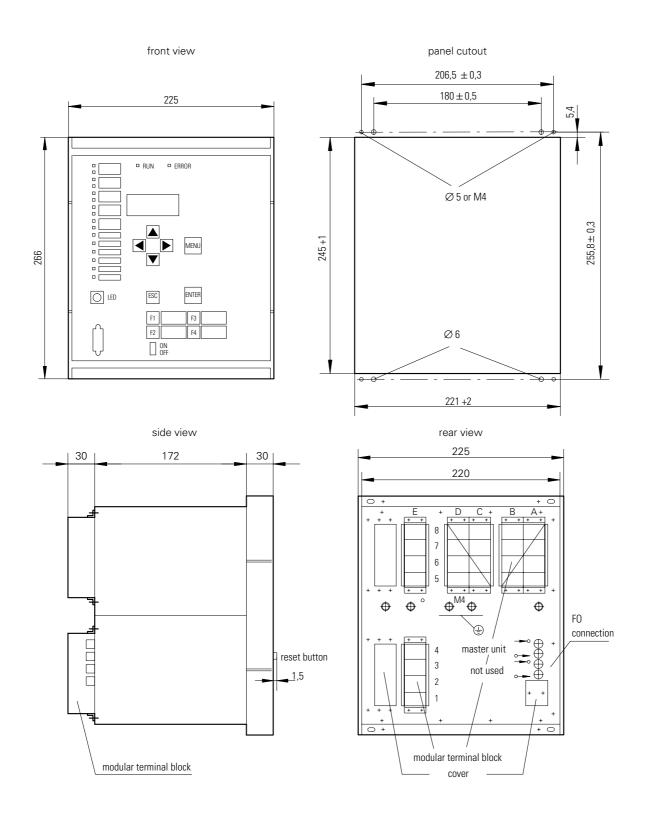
Mechanical dimensions 7XP2040–2 for panel or cubicle flush mounting (all dimensions in mm)
